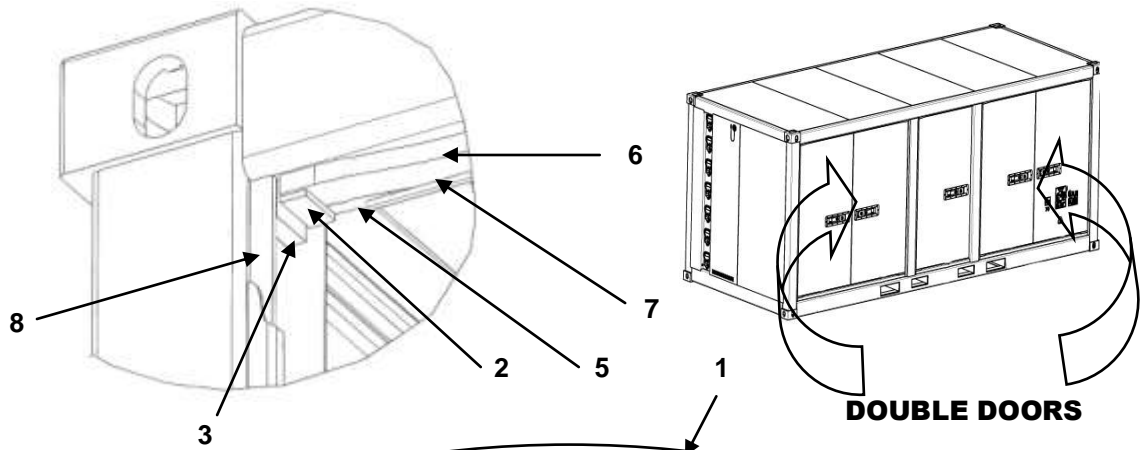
FPU 20-1 POCKET DOOR HANDLE ASSEMBLIES
